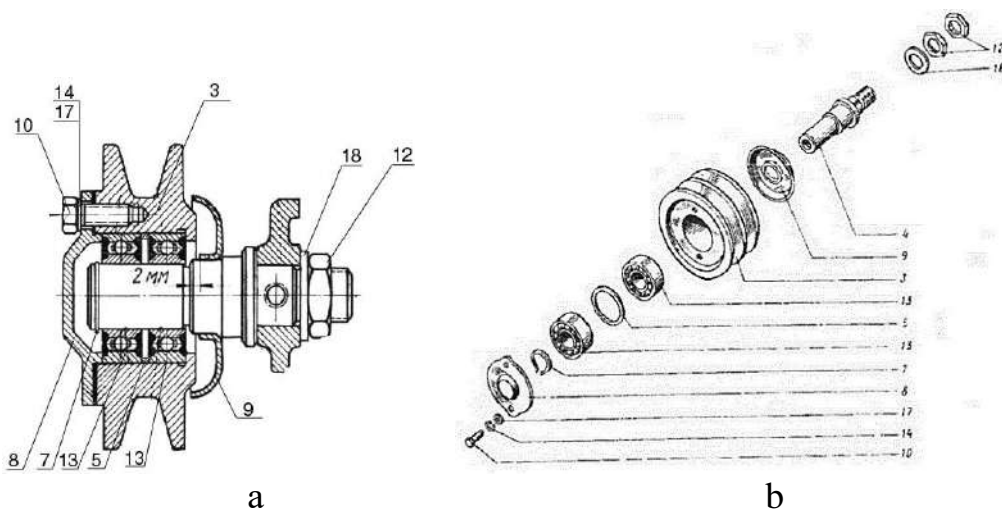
Sketch of assembly unit; a – a sketch as an assembly drawing; b – a sketch as a three-dimensional image of component parts of an assembly unit
